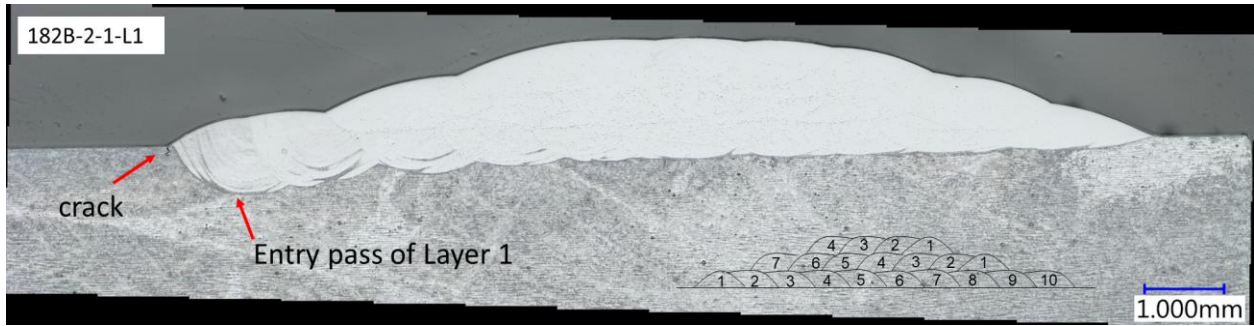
A weld cross-section produced in the previous weld campaign (M3LW-23OR0406015) showing a small crack in the toe region of the entry pass.
